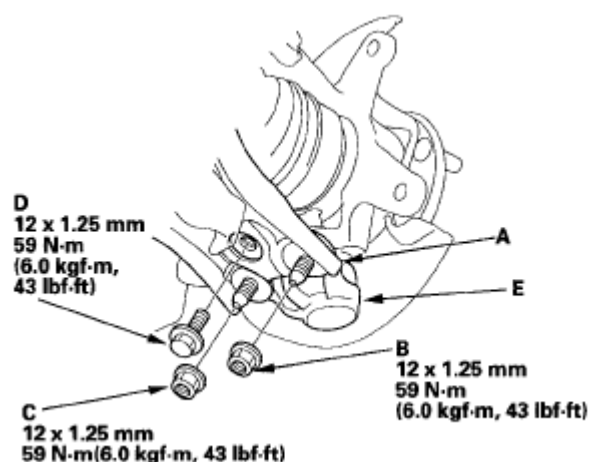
Identifying Lower Ball Joint (With Torque Specifications)
